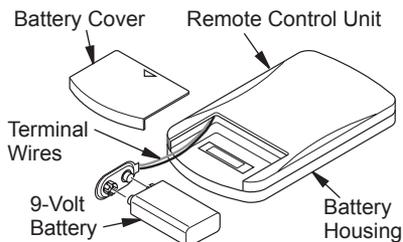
Installing Battery in Hand-Held Remote Control Unit
